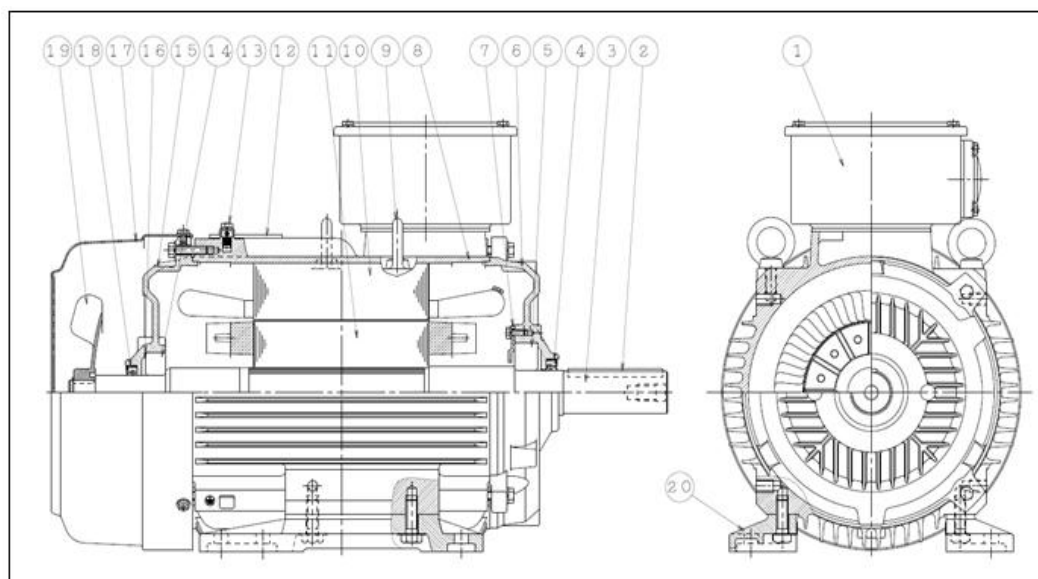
Schematic diagram of 63-132 frame aluminium motor, feet version
